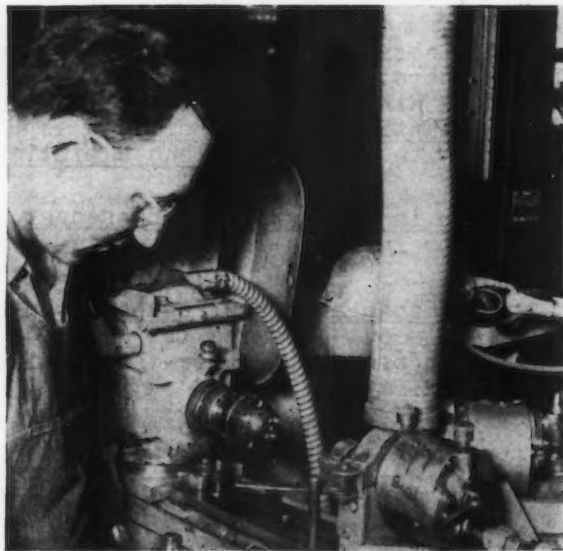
The valve hole and valve seat are ground in this setup. The hole is ground with one grinding wheel and the 45° angle by a second grinding head.
